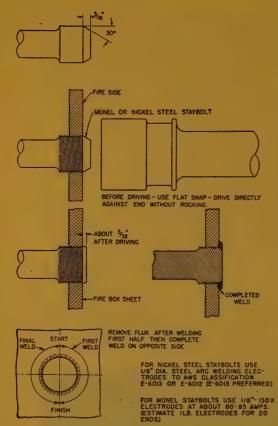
Recommended procedure for seal welding staybolts on the fire side.
